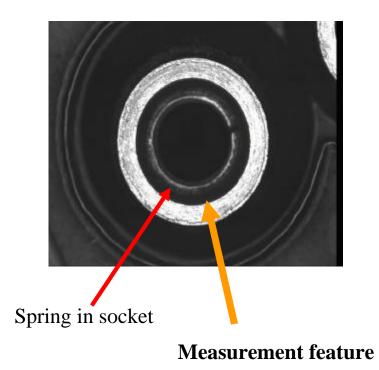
Image of a typical socket used in this measurement. The spring used to hold the pin of an IC chip can clearly be seen. We measured the inside of the thick wide band of metal which is the socket. Because the part could not be backlit. Through the lens lighting was used.
